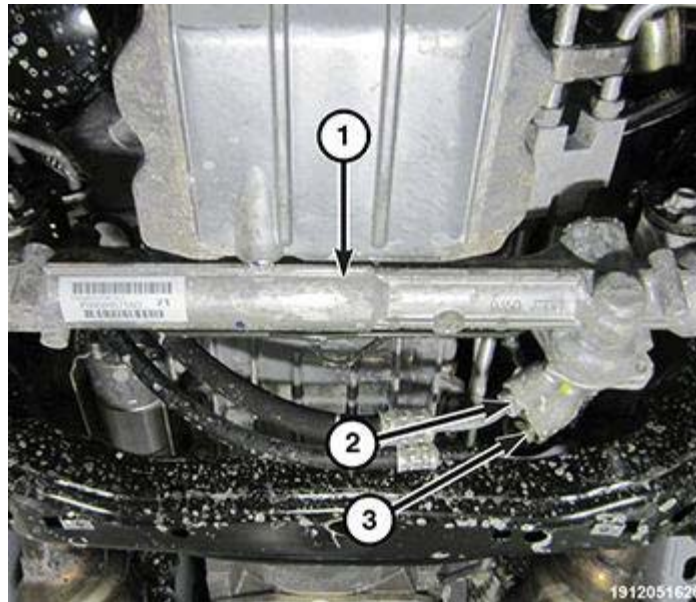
Steering Gear, Pressure Hose & Return Hose
